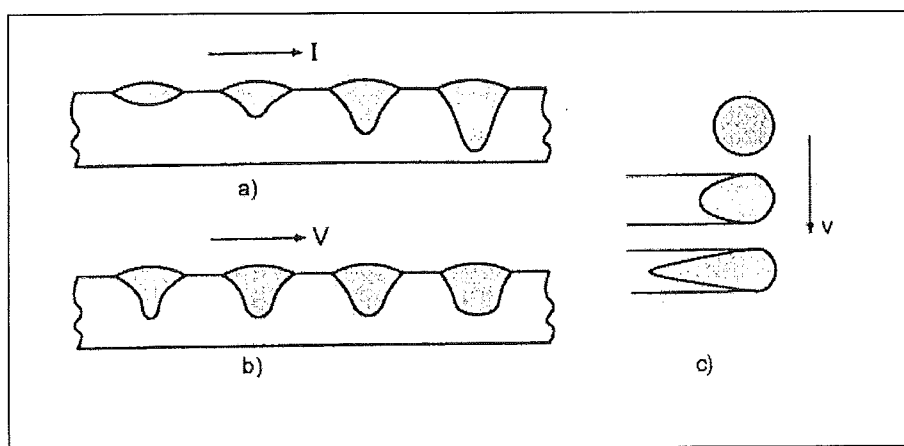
Influence of welding parameter: (a) increasing welding current; (b) increasing voltage and (c) increasing welding travel speed on the weld pool shape [7].
